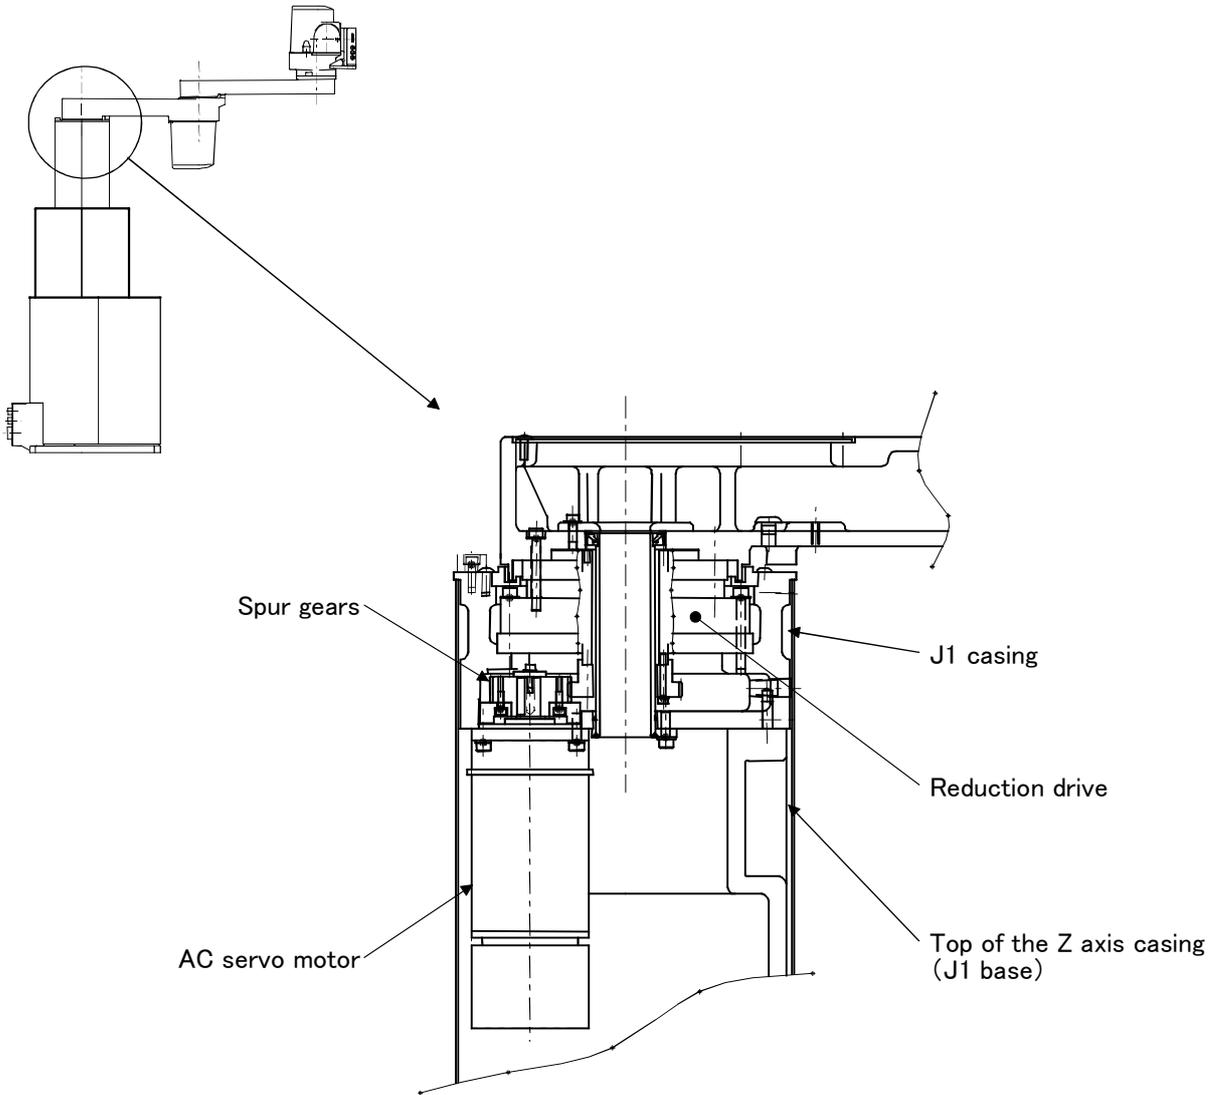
J1 axis drive mechanism (RH-1000GHDC-SA/GJDC-SA)
